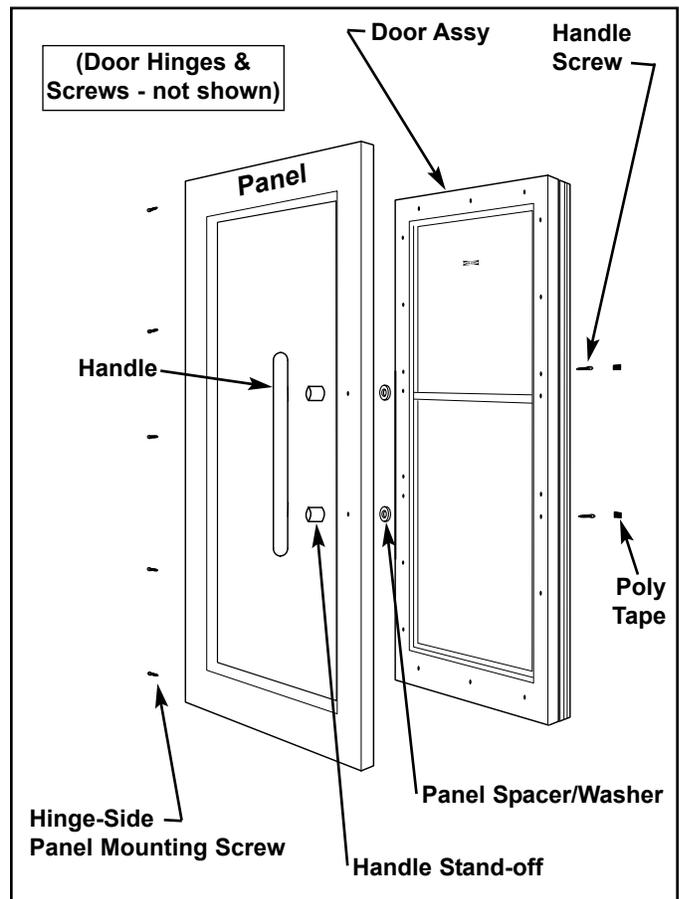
Model 430 Stainless Steel Door Panel Removal
